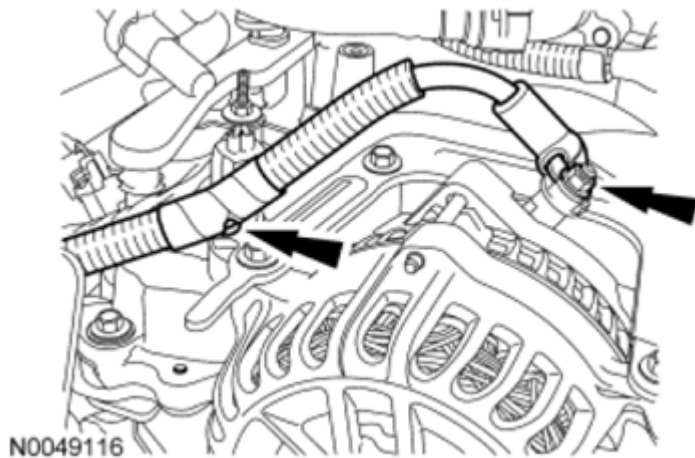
Locating Generator Battery Cable Pin-Type Retainer
